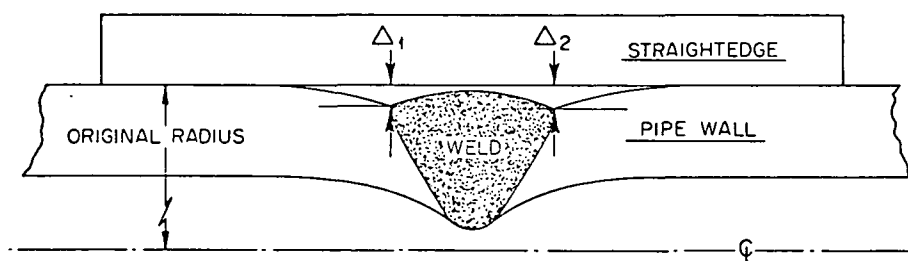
Weld Shrinkage Measurement
